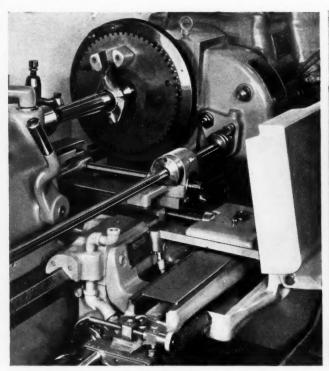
Taper Attachment Guard of Sidney Universal Relieving Attachment Raised to Show Right-angle Drive from the Change-gear Housing to the Compound Rest
